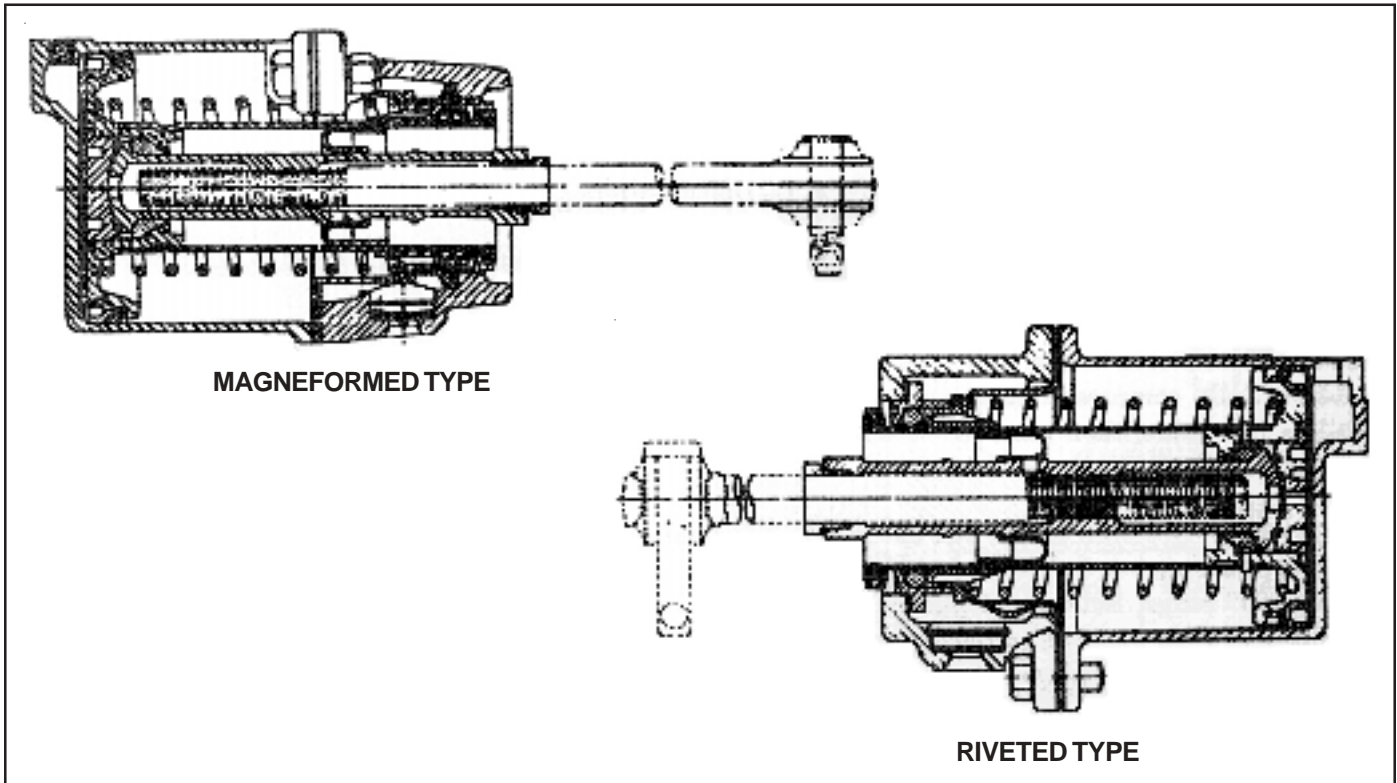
WABCOPAC and NYCOPAC Brake Cylinder Assemblies
